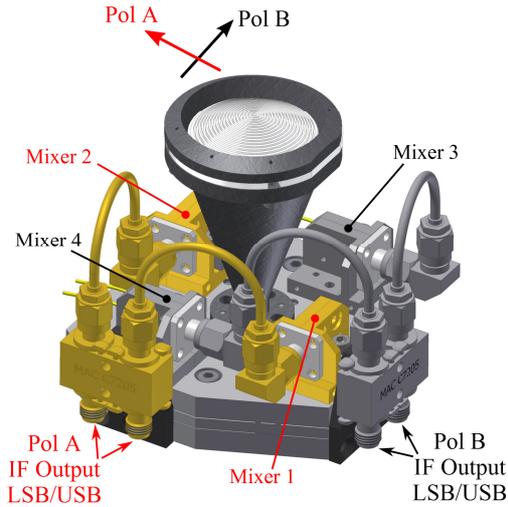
DL-2SB block shown with the feed horn, mixer blocks, IF cables, and IF hybrids connected.
